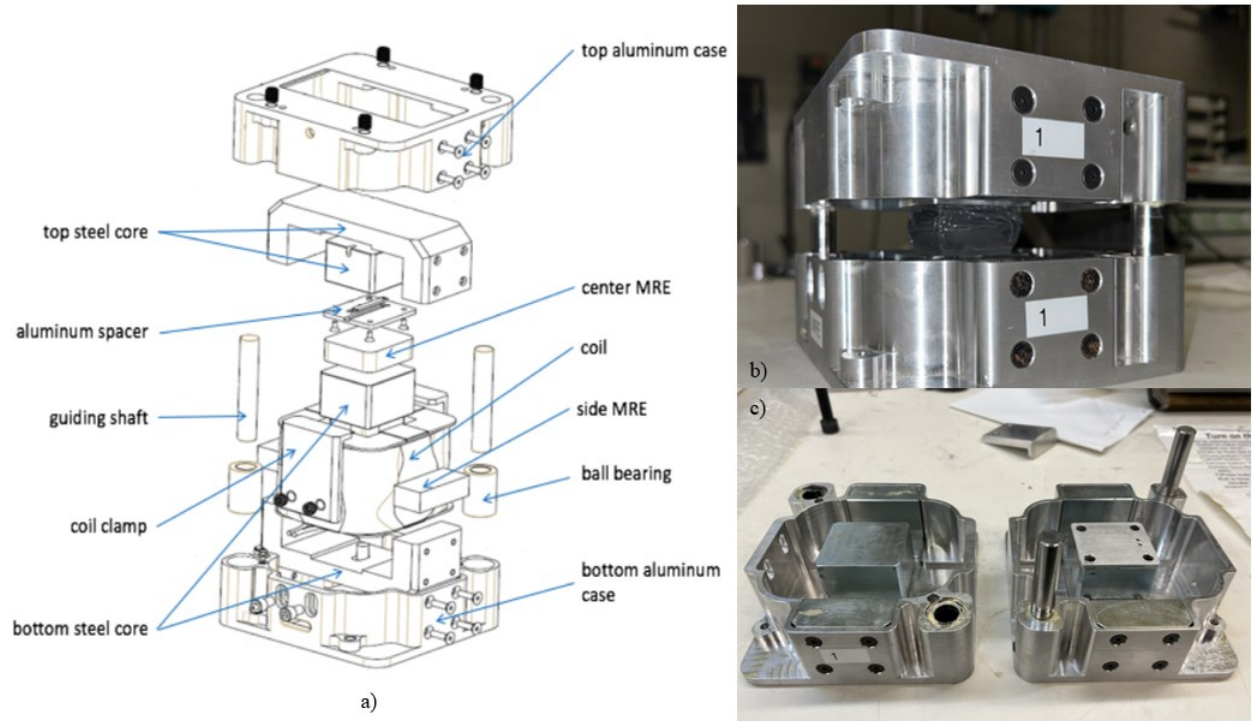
Housing Unit a) Schematic exploded view [46] b) Assembled with sample (No Coil) c) Bottom half (right) Top half (left)
